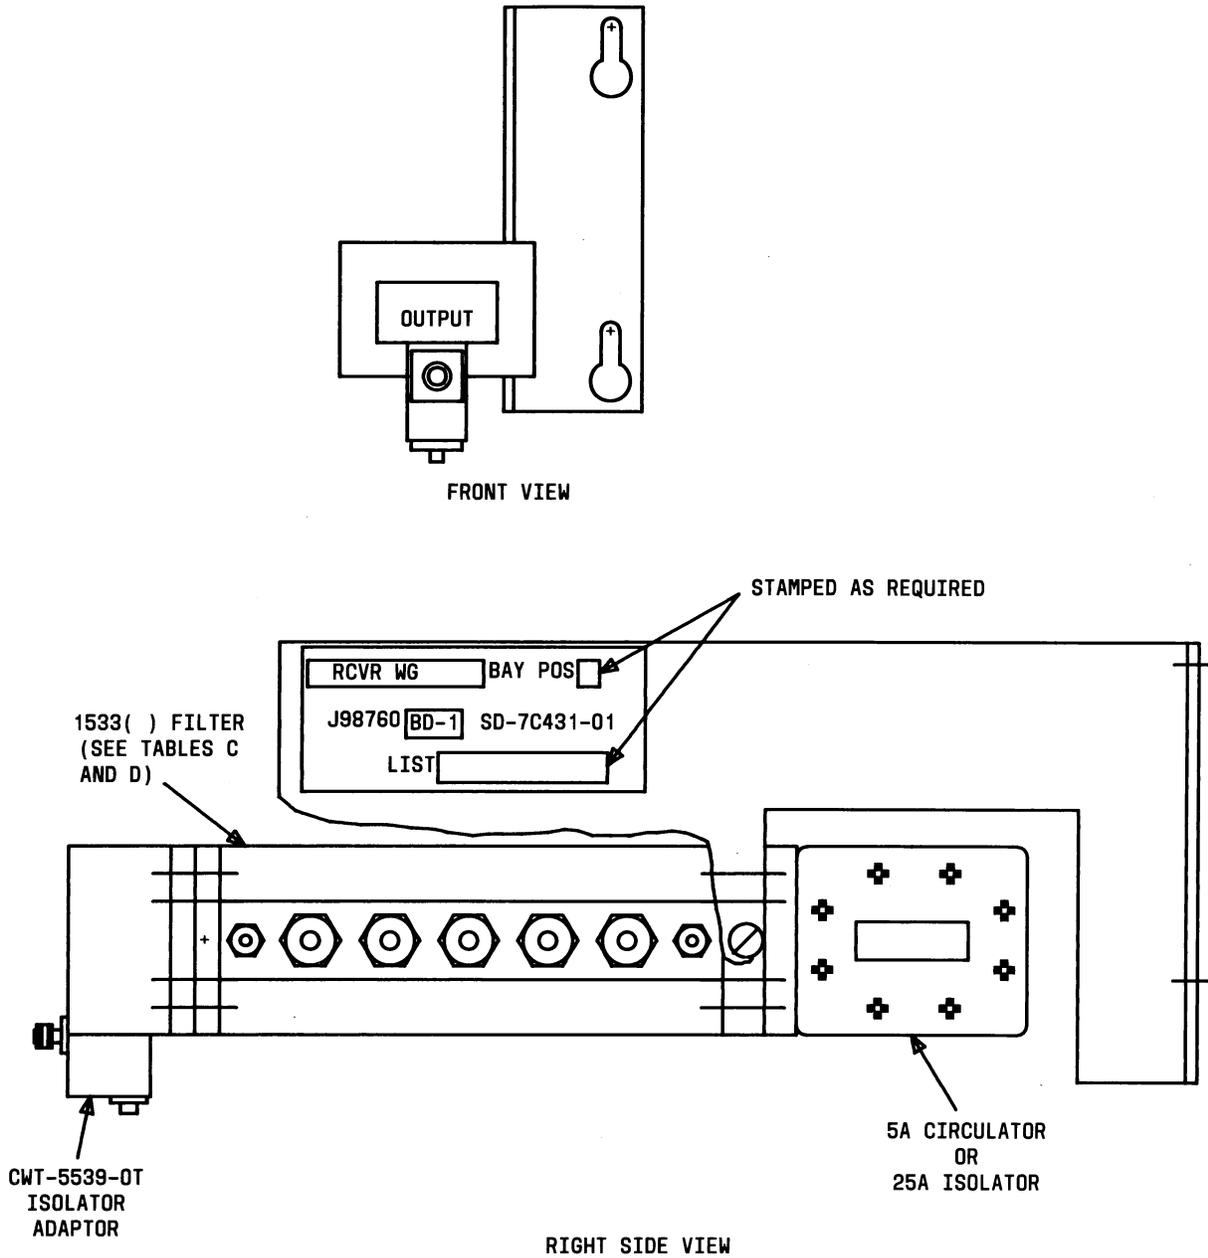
11-GHz Regular Receiver Waveguide Assembly
